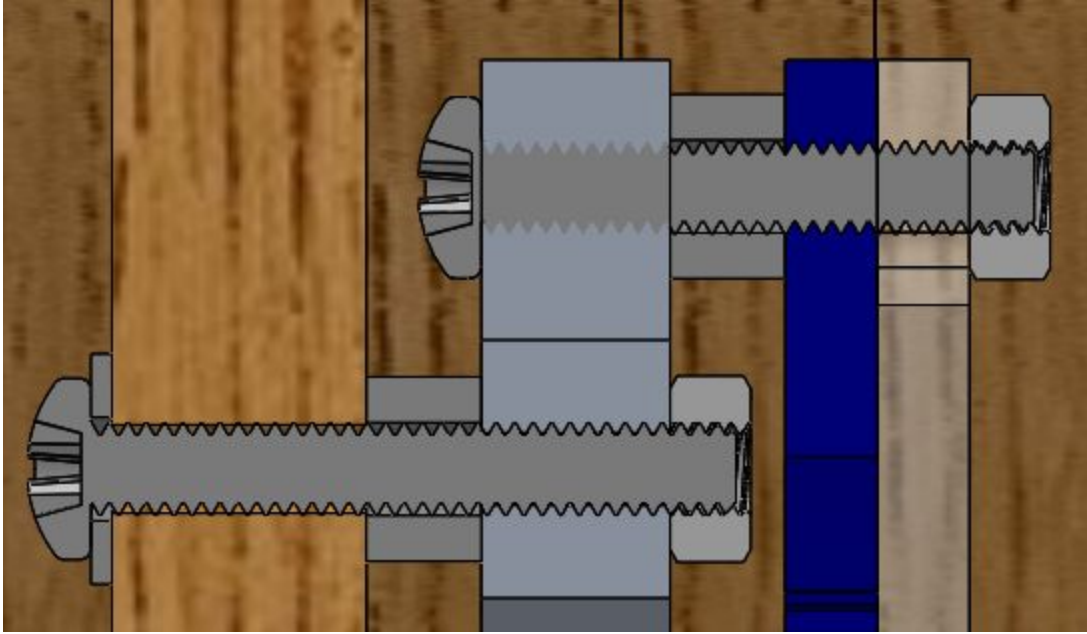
Section view of lazy susan bearing and weather sheet assembly
